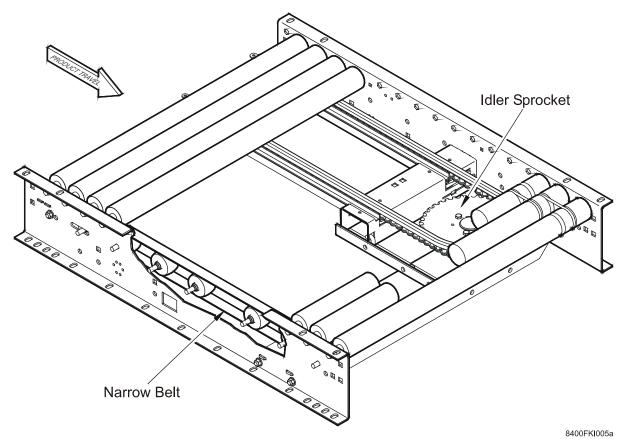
Accuglide Idler Section (LH Assembly Shown)
